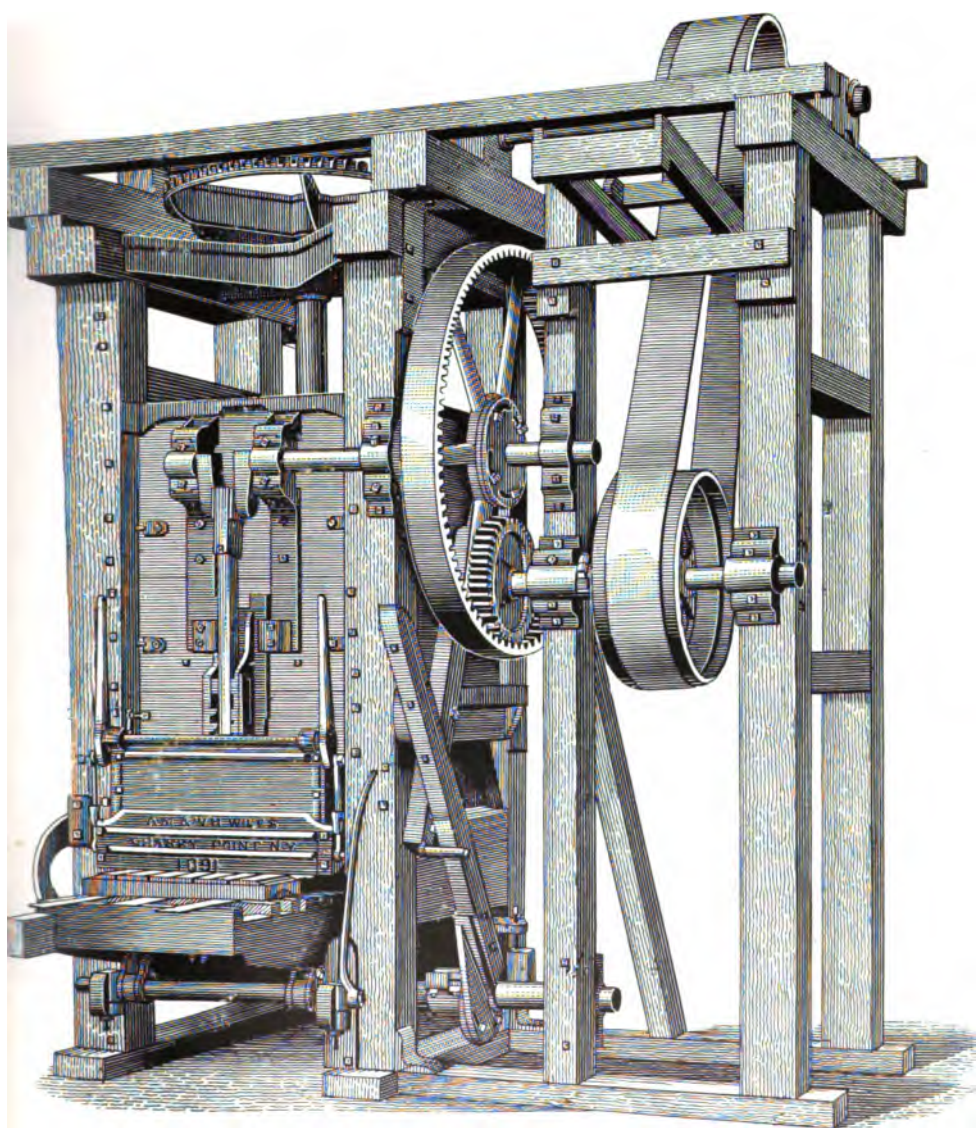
PLATE VII.—“IRON QUAKER” (HORSE-POWER) BRICK MACHINE.
